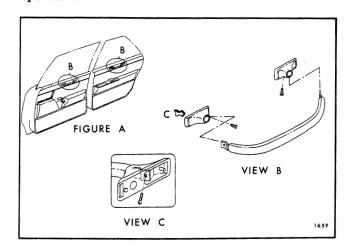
Door Pull Handle Installation - 68200 Series Shown - Other 68000 Series Similar
